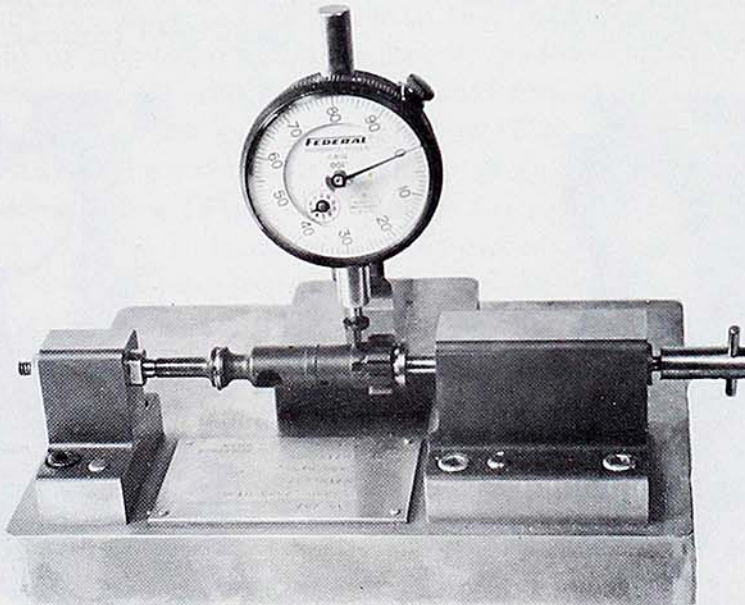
Dial Indicator Gage in Position for Checking Slot Diameter Concentricity.
